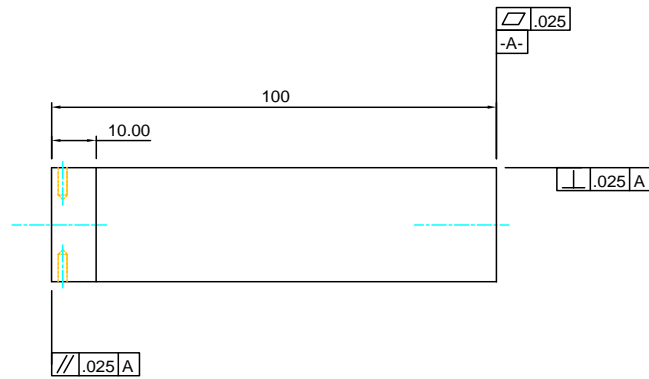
A detailed drawing of the 17-4PH stainless steel (SS) base in the custom compression rod shown in Fig. 2-4.
